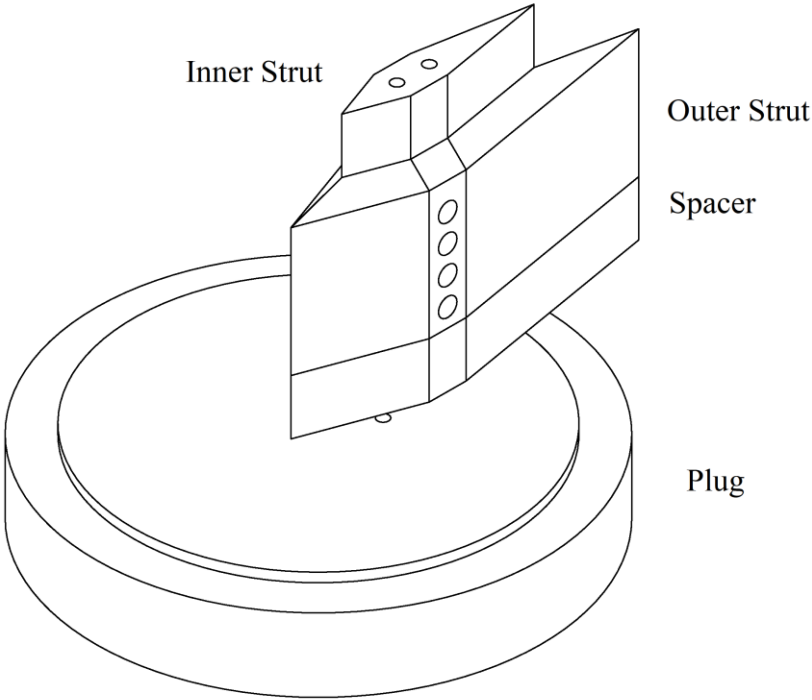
Mach stem generator wedge model struts, spacer, and plug assembly.
